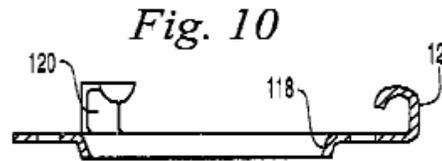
is an exploded and cut-away perspective view showing some of the components of the compressor (*id.*, col. 2, ll. 17-18), including bearings 62 and 64. Figure 10 is a plan view of a washer that is part of the secondary bearing (*id.*, col. 2, ll. 33-34).
